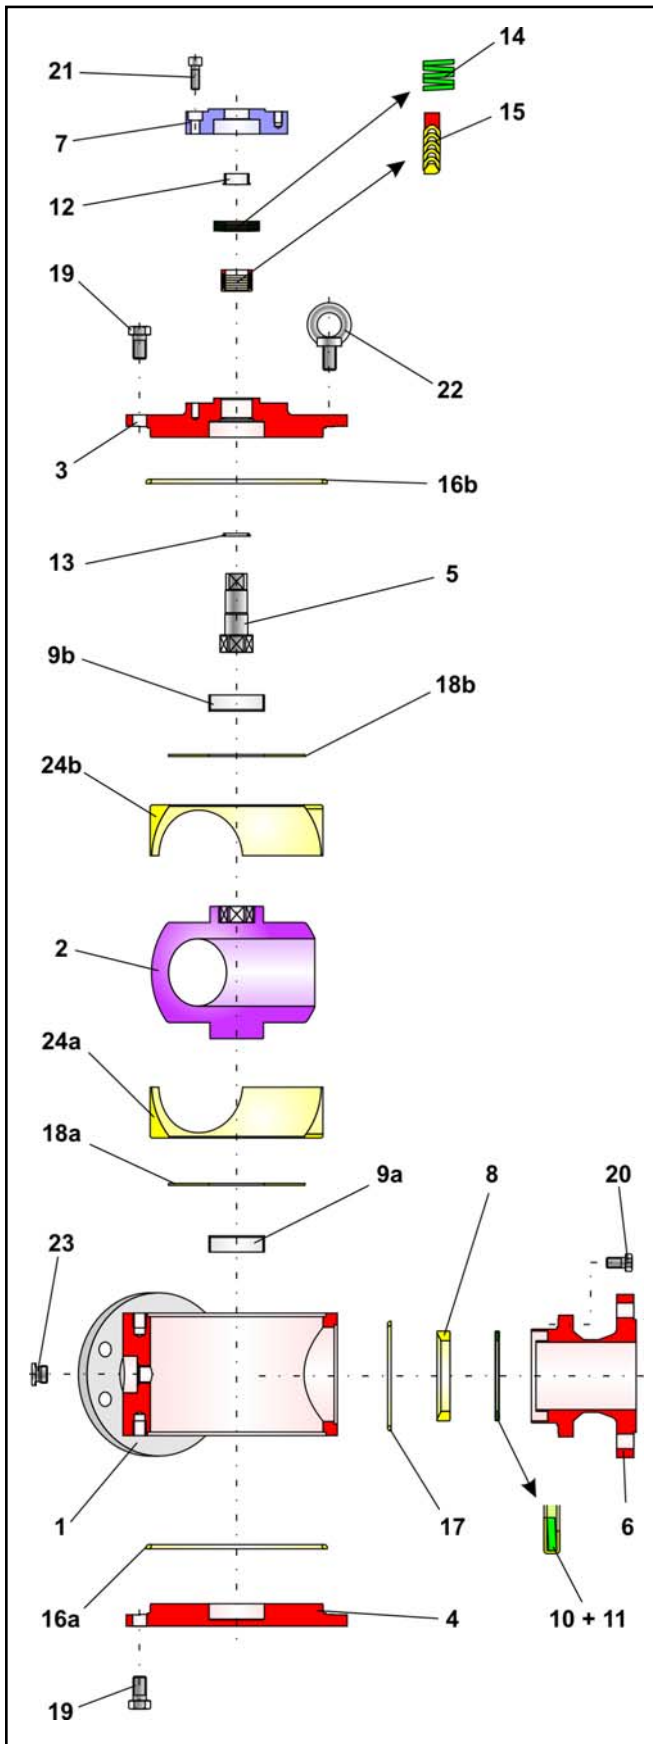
Explosion drawing of the 3-way diverting valve 29a
